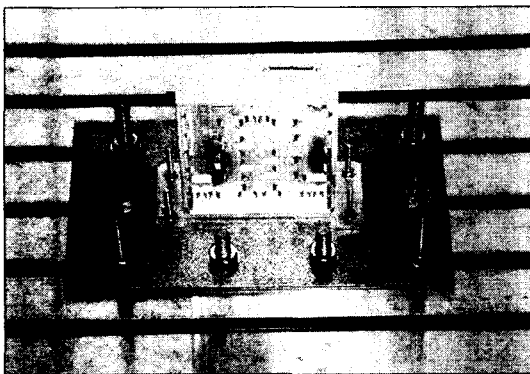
Photograph of the Channel Amplifier Housing with Steel Plate Jig for Modal Test
